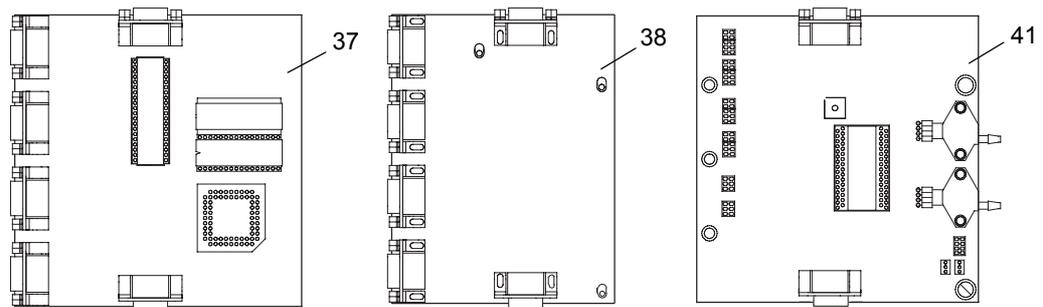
Spare parts Uniport, CANDI, Supervisor board
